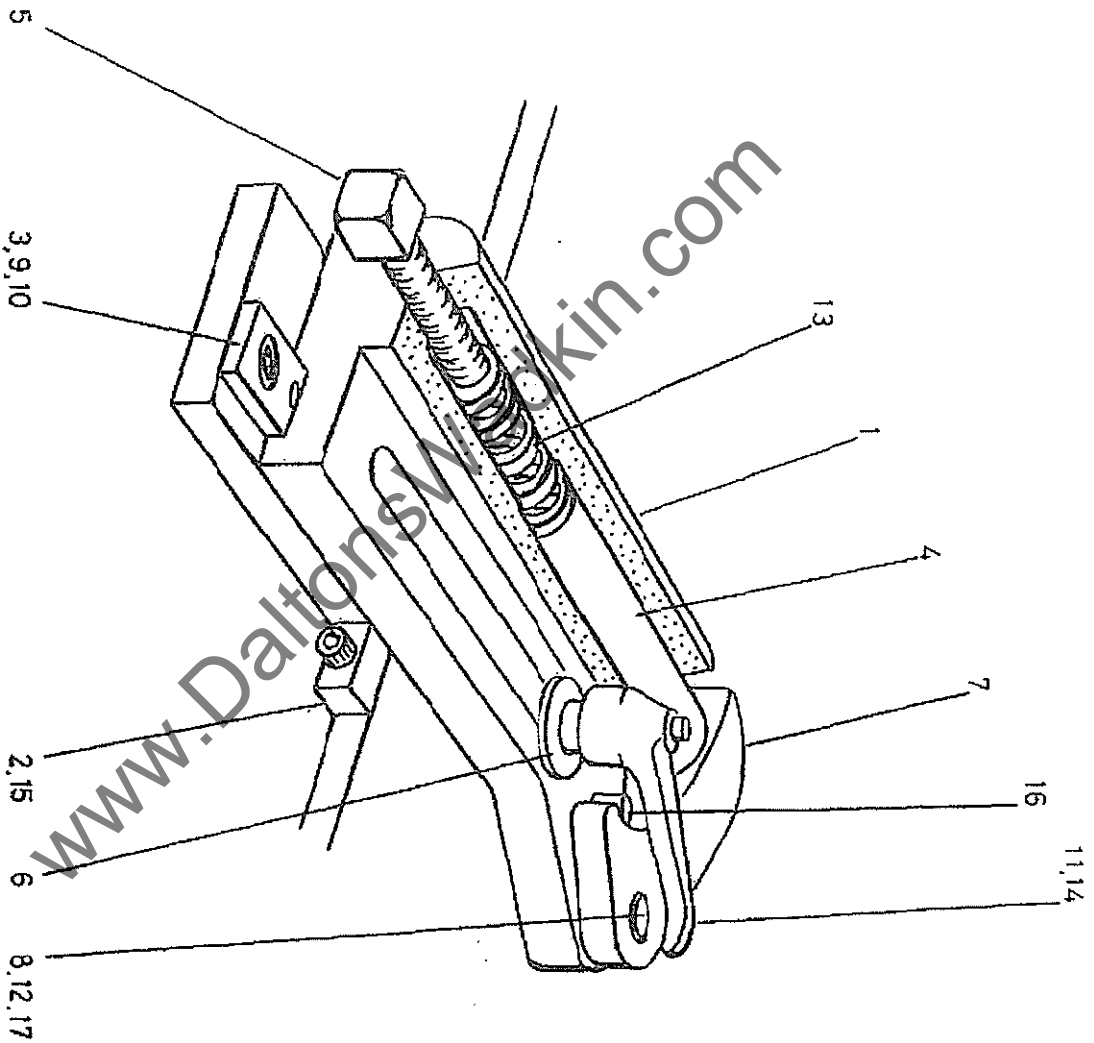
'SMD' TYPE SIDE PRESSURE - SPRING OPERATED
